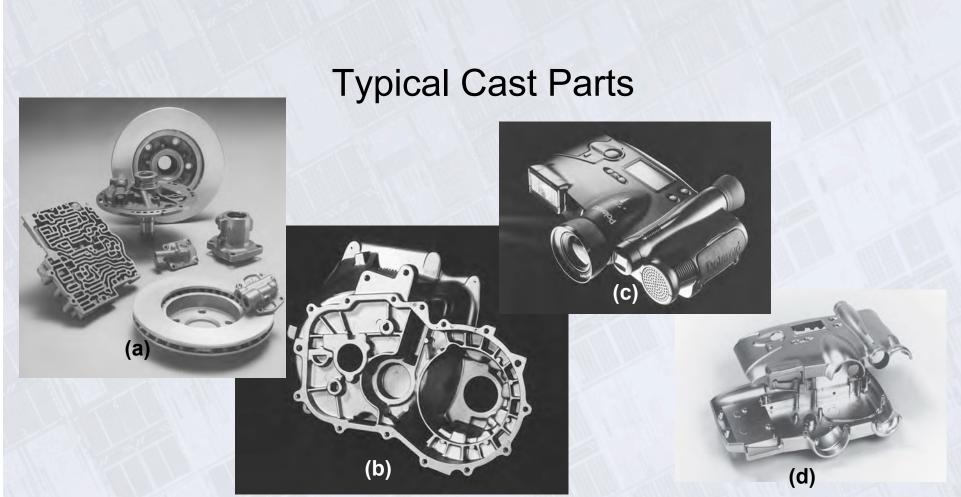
(a) Typical gray-iron castings used in automobiles, including the transmission valve body (left) and the hub rotor with disk-brake cylinder (front). *Source*: Courtesy of Central Foundry Division of General Motors Corporation. (b) A cast transmission housing. (c) The Polaroid PDC-2000 digital camera with a AZ191D die-cast high-purity magnesium case. (d) A two-piece Polaroid camera case made by the hot-chamber die-casting process. *Source:* Courtesy of Polaroid Corporation and Chicago White Metal Casting, Inc.
